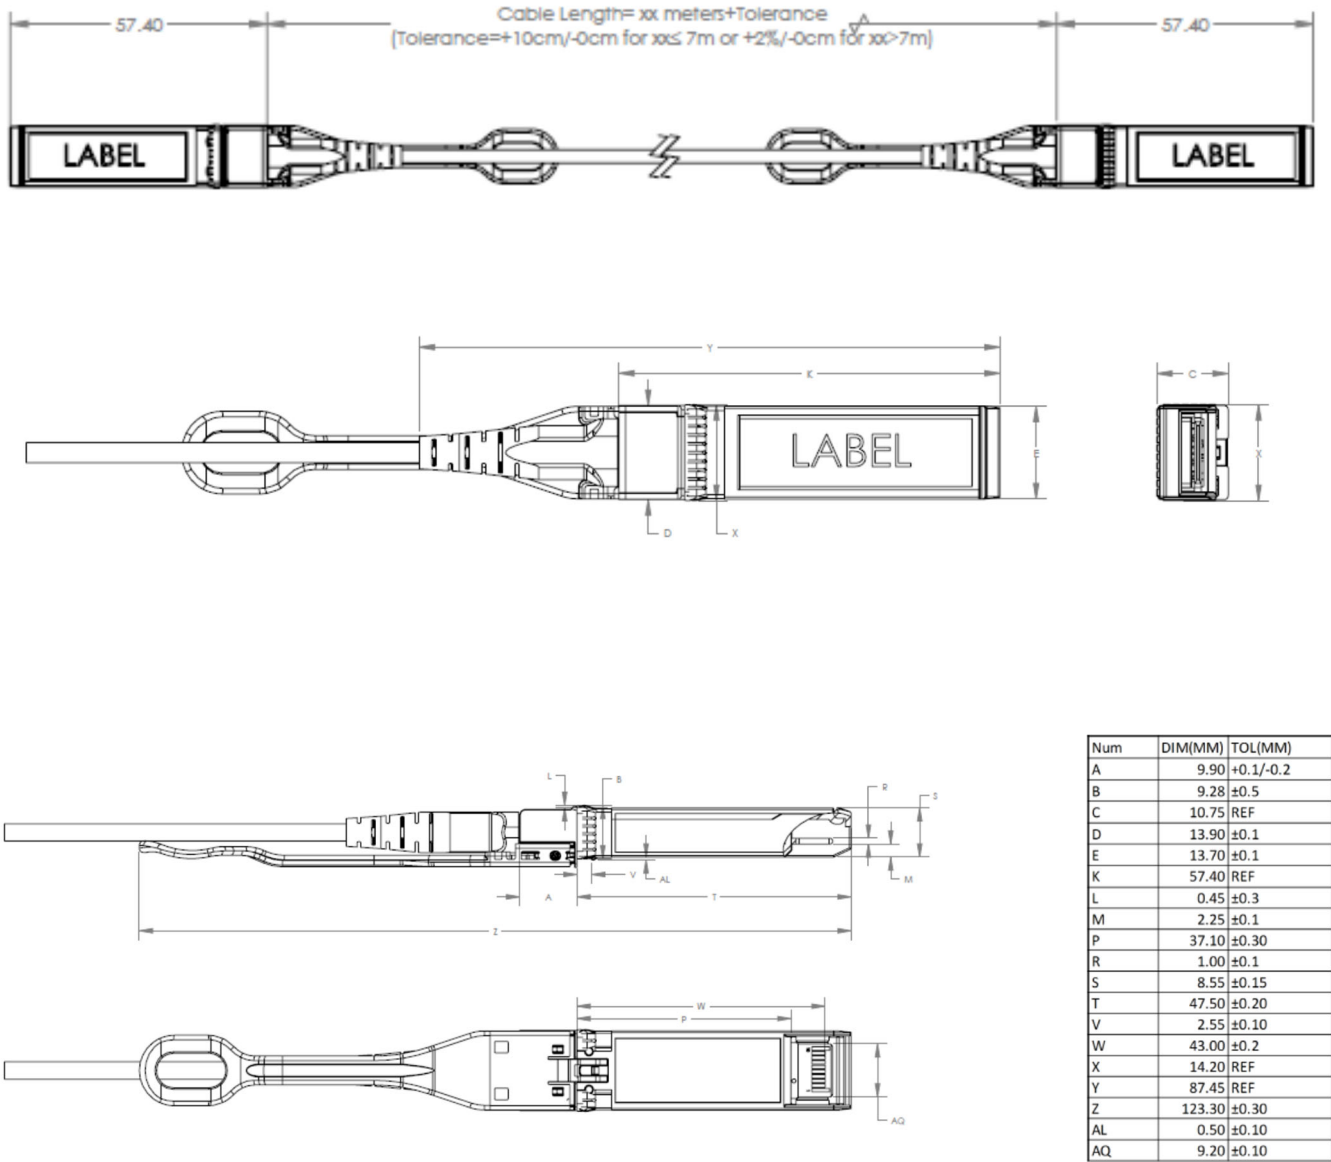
FCBG125SD1Cxx-WX Mechanical Dimensions.
